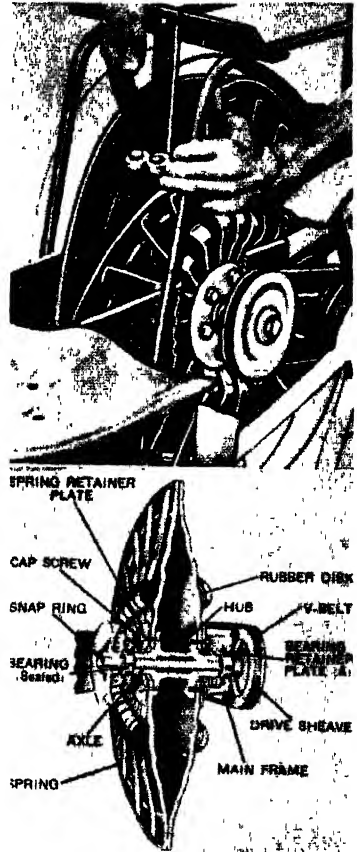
Steel-spring fingers holding two rubber disks for transplanting plants. The top view shows rollers to spread the rubber disks so the plants can be placed between them. (Deere & Co.)
